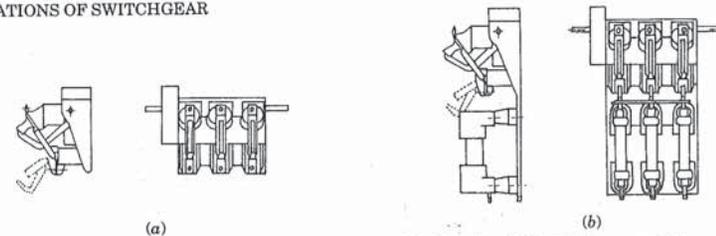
Knife-contact switch-disconnector: (a) without and (b) with fuse assembly
